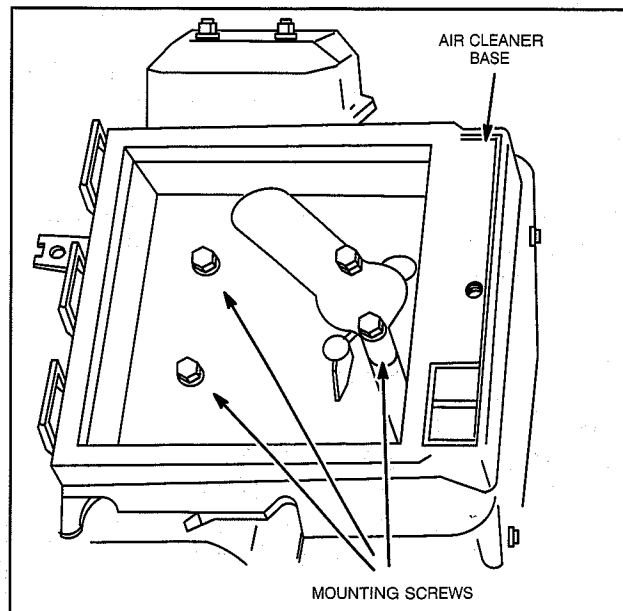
Removing Air Cleaner Base - (Early Style)
